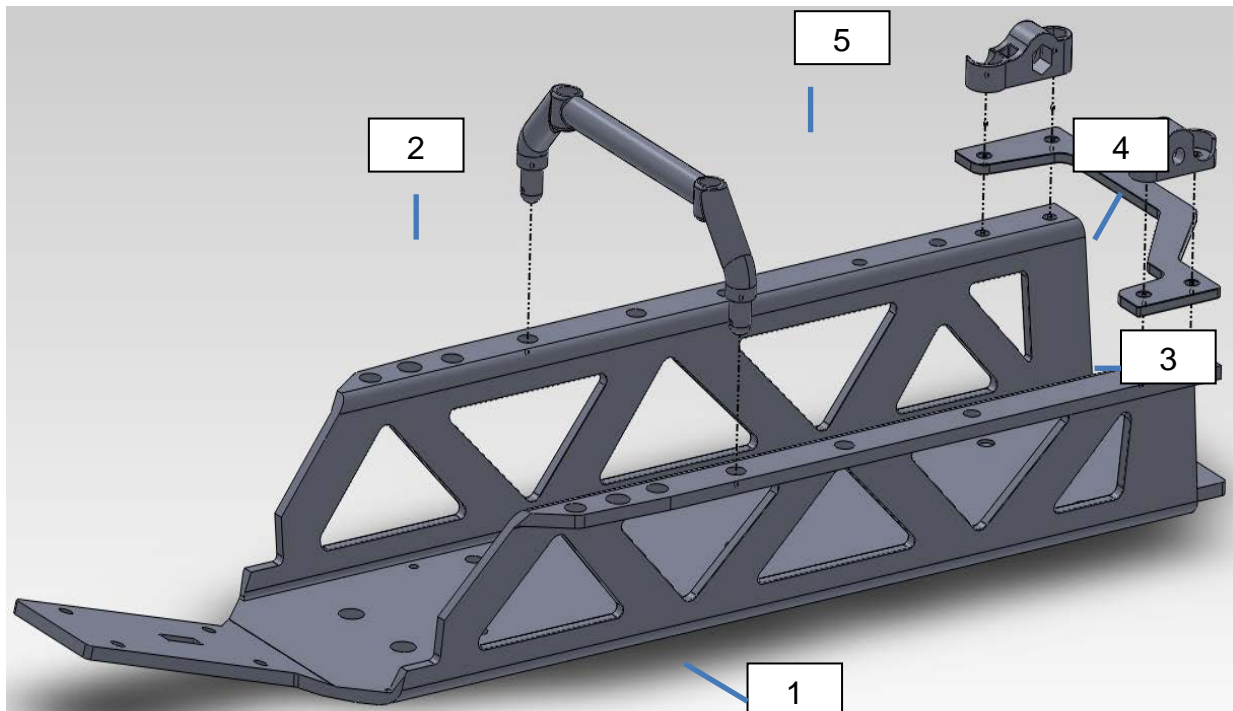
5b: Exploded view of the first META-iFAB assembly exercise - chassis part.
